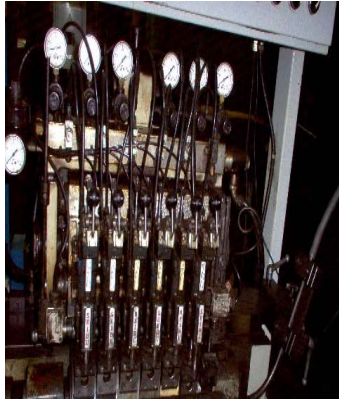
Pneumatic tools for High finish active surface provided with carbide inserts glued.
